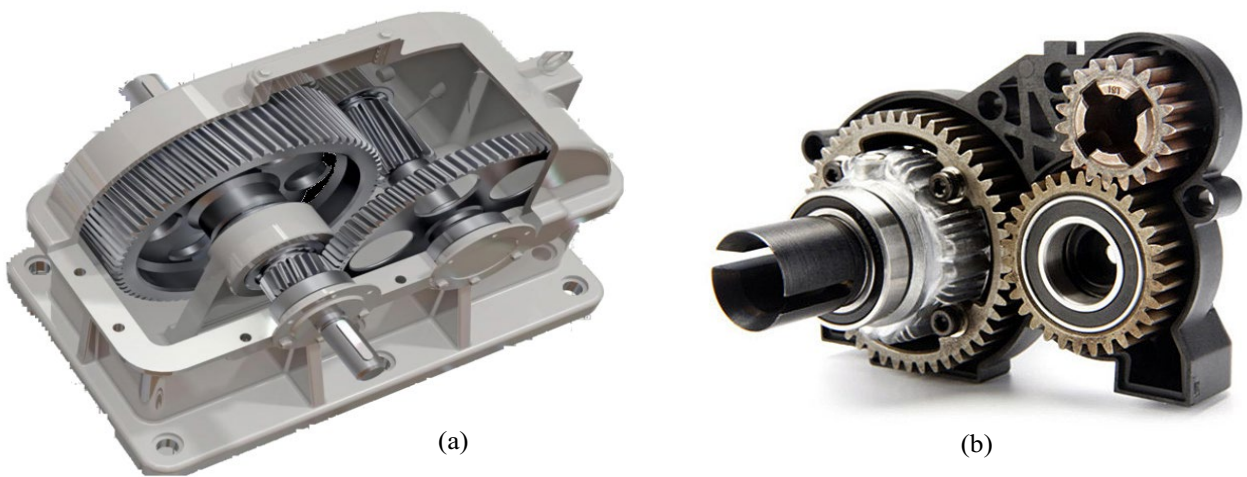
Examples of gearboxes [9, 10]: (a) helical gears, (b) spur gears.
